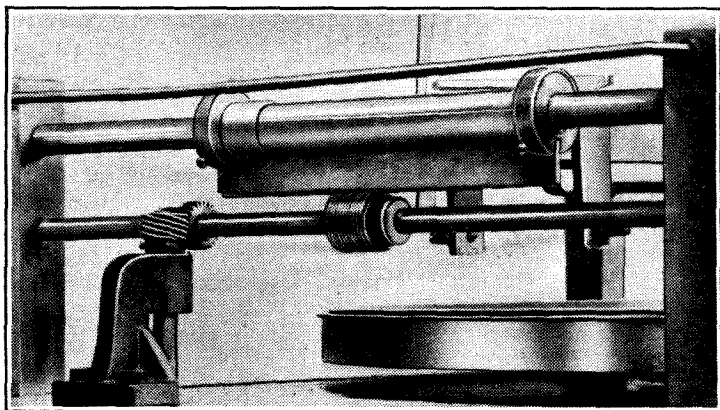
Tracking mechanism in which a worm driven by bevel gears drives a rack mounted on the tracking arm.
